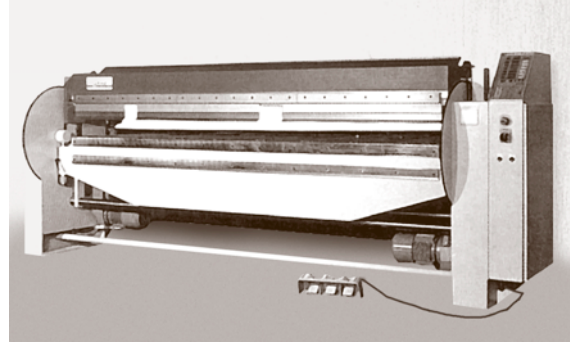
Bending-flanging machine with roofing metal sheet profile programming
